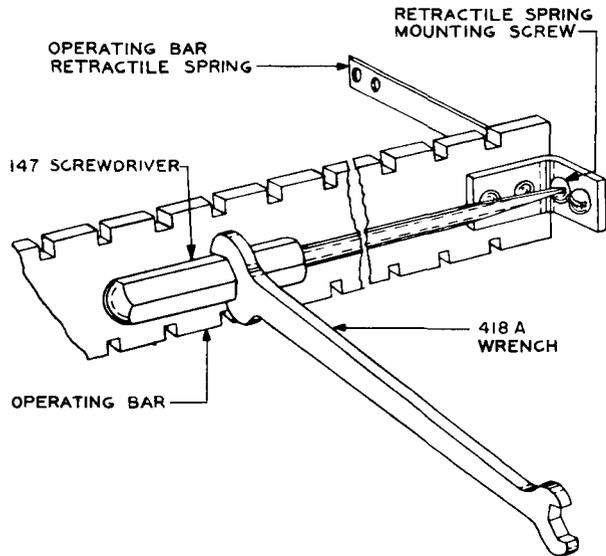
Method of Removing Retractable Spring Mounting Screws
